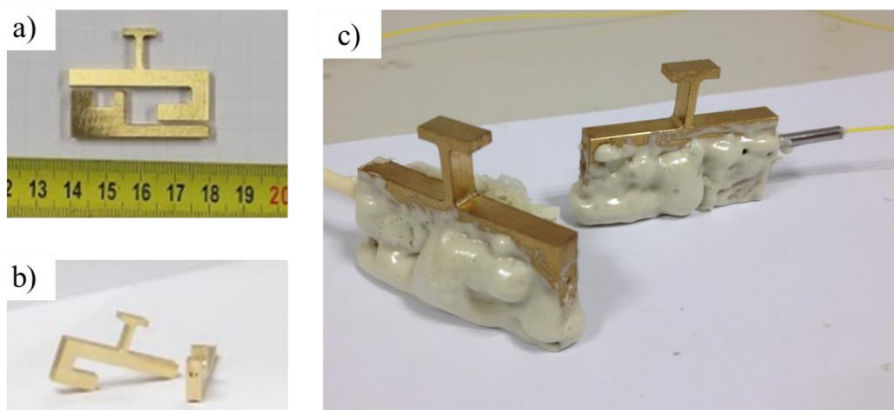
Details of the two components of the sensor FBG01 (a and b) and aspect of the sensor after PU spray fulfillment without surfaces regularization.
